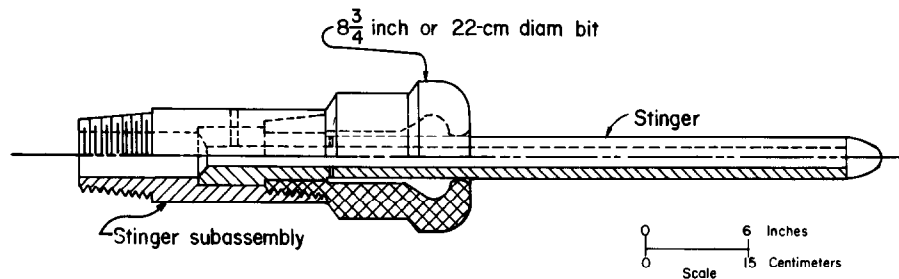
"Stinger" assembly for reaming pilot hole.
